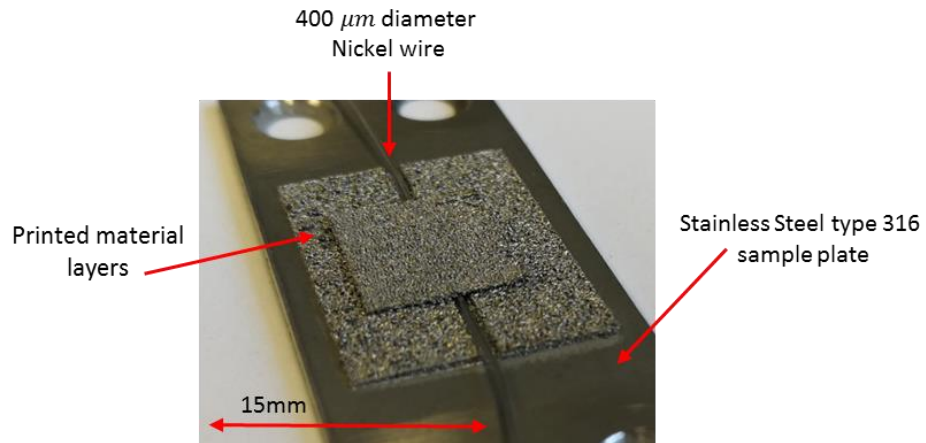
Nickel wire embedded in printed SS 316 coupon.
